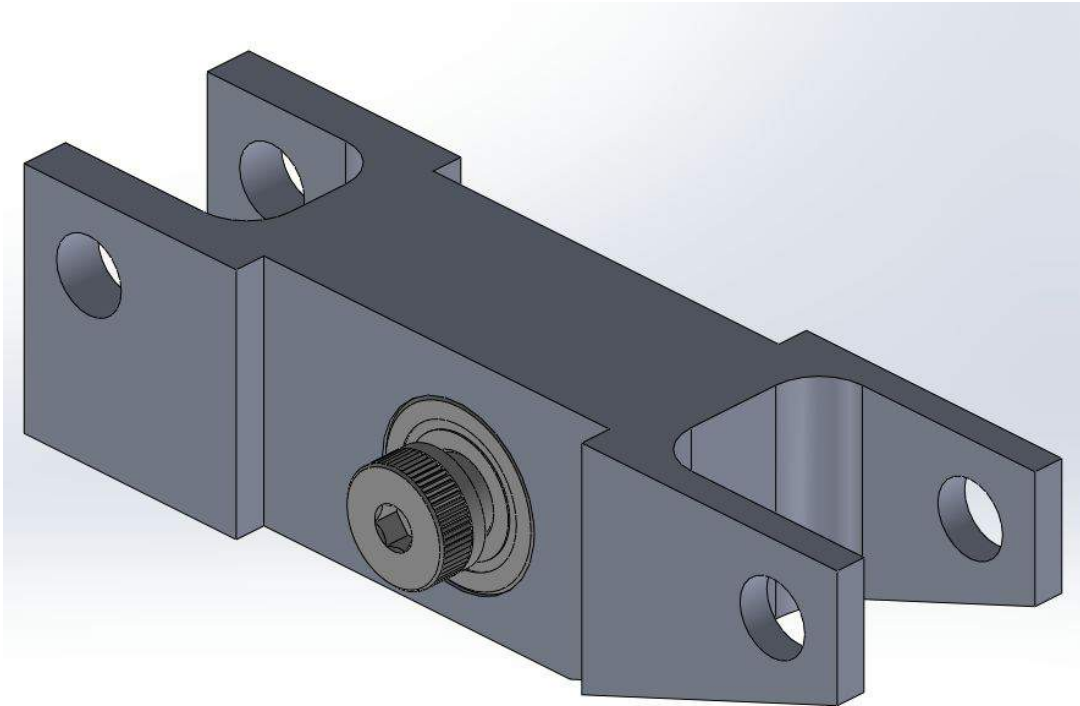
Shocker Rocker CNC Component with Bearings and Shoulder Bolt
